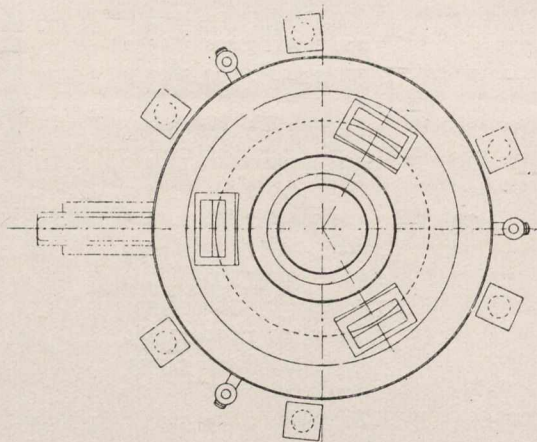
Plan of Furnace with Shaft and Electrodes Removed.
